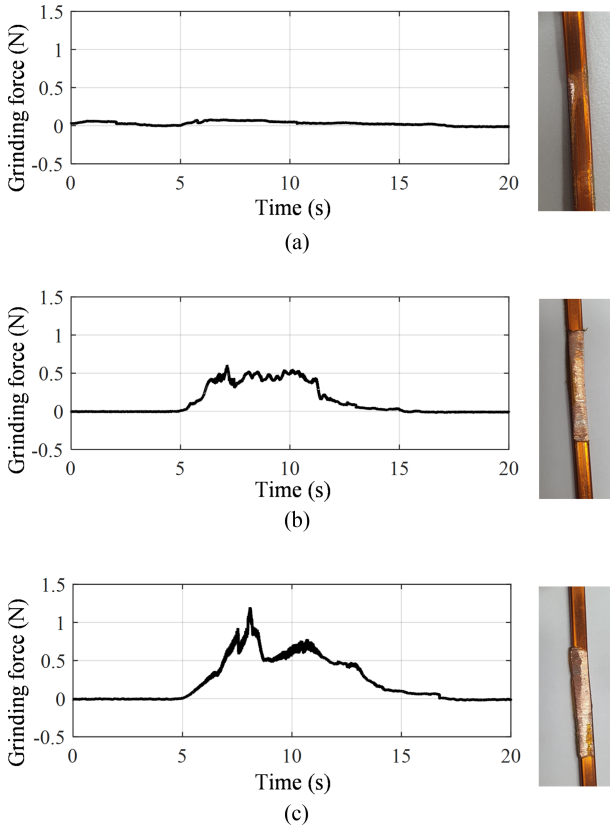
Grinding force and machined copper wire in accordance with the machining depth
